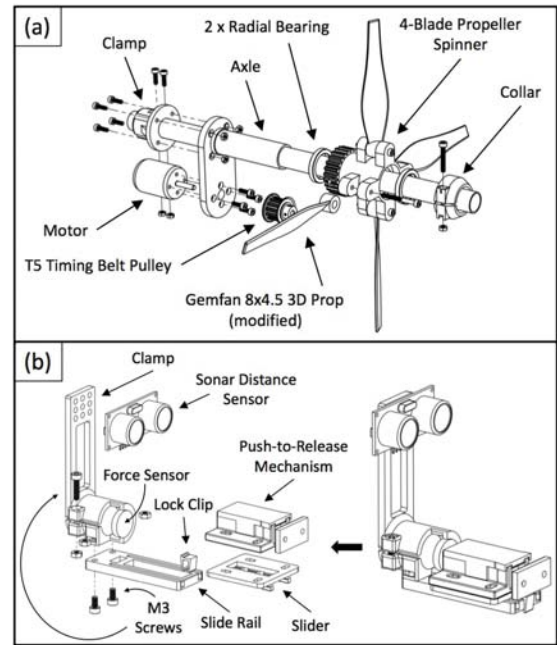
Vehicle design overview. (a) Boom propeller assembly; (b) Push-to-release end-effector assembly.
